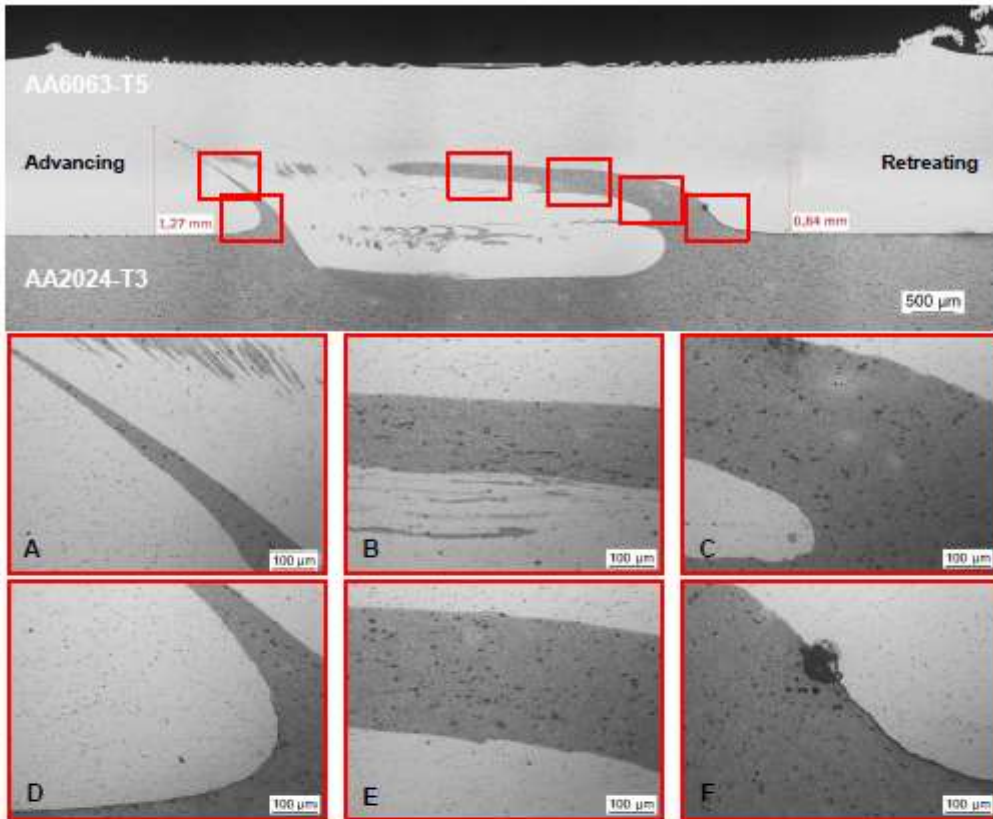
Cross-section of a FSW lap joint produced at "hot weld" conditions by F101 welding tool.
